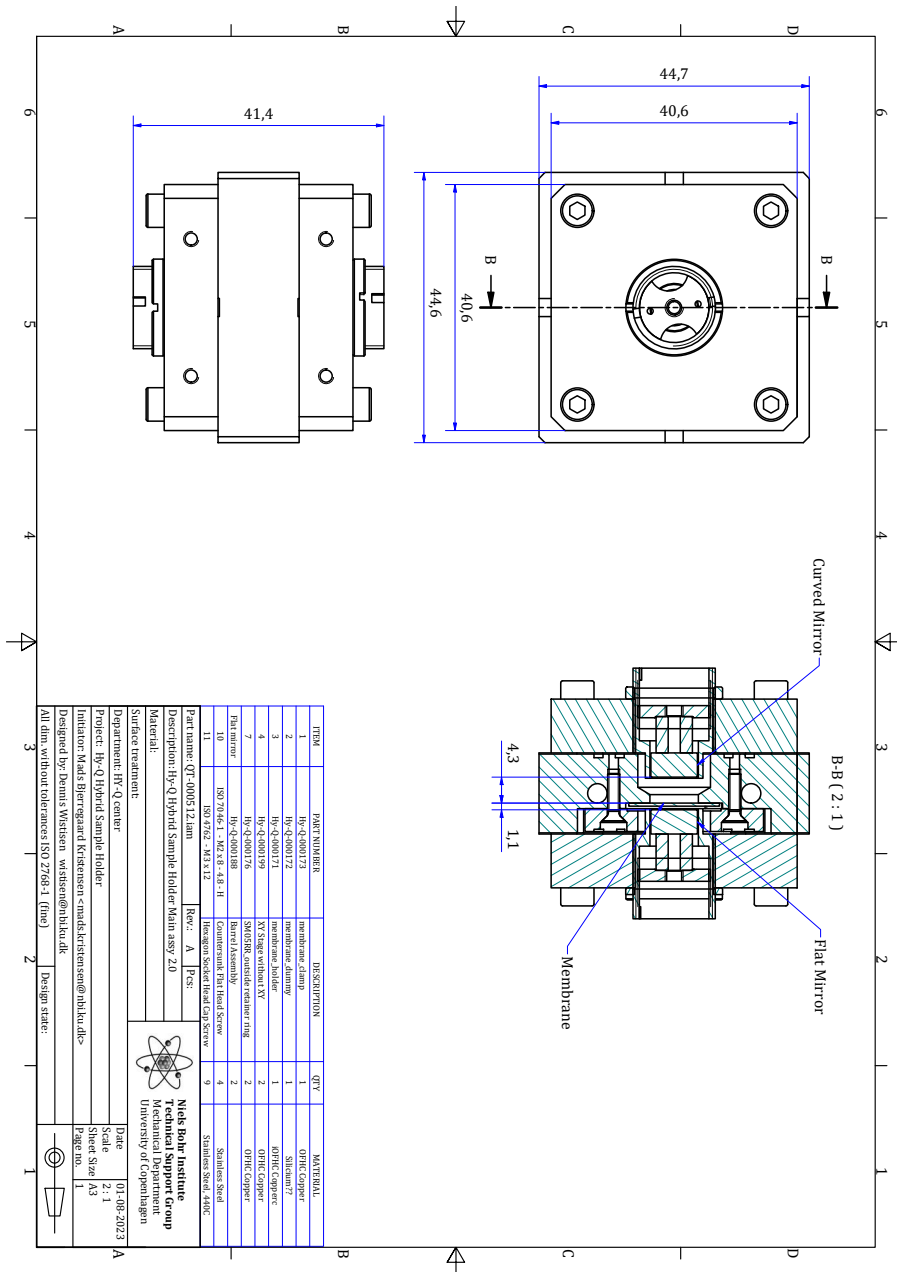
Cavity assembly schematic. The assembly is comprised of three main parts: two mirror holders and one membrane holder. The membrane holder has through-holes for clamping to the cryostat coldfinger and a recess to accommodate the membrane. The membrane is clamped with a "coin" lid. The mirror holders each host a mirror in a barrel-assembly (fig. E.1) and are screwed to the membrane holder.
